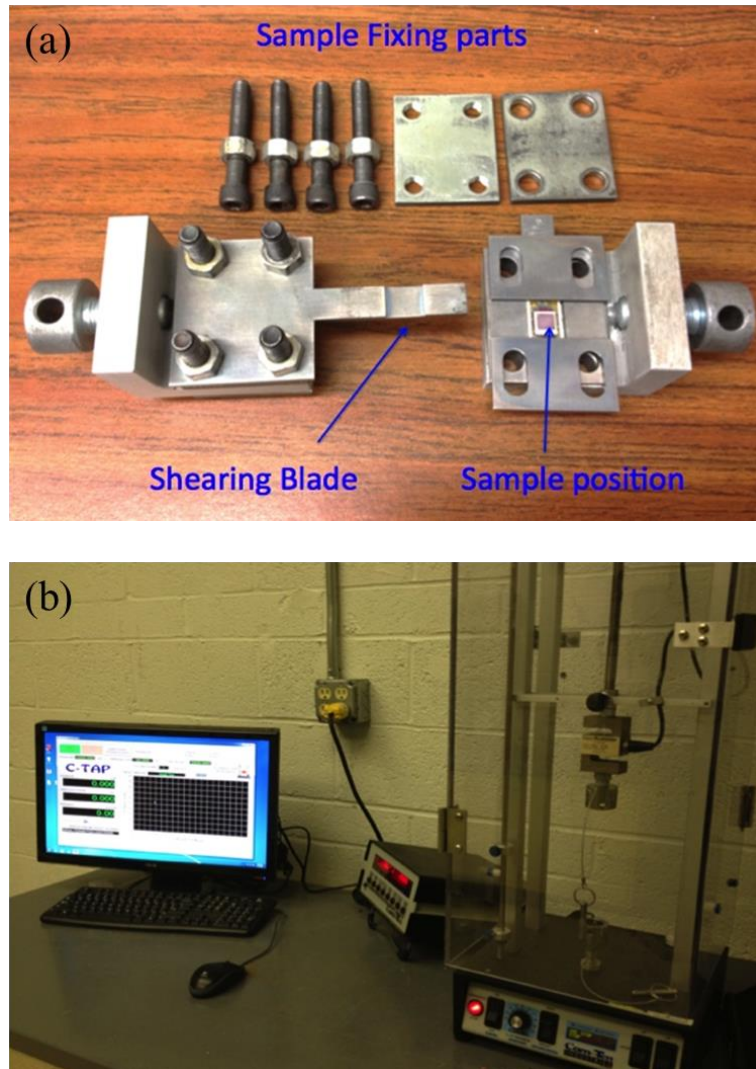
(a) is the fixture to hold and shear chip attachment samples, and (b) is ComTen 95 series tester for die-shearing.
